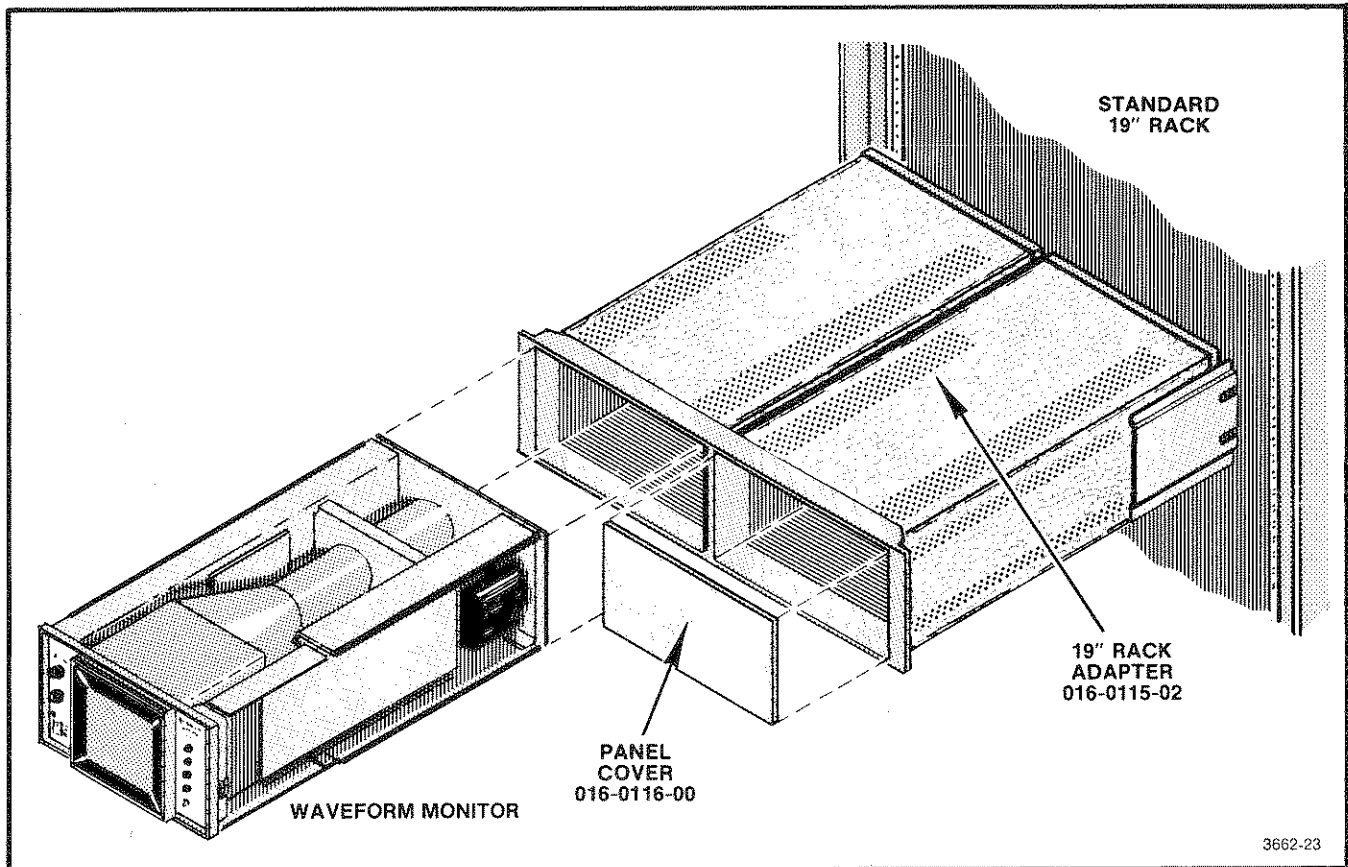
Rack installation in the rack adapter (cradle mount).
